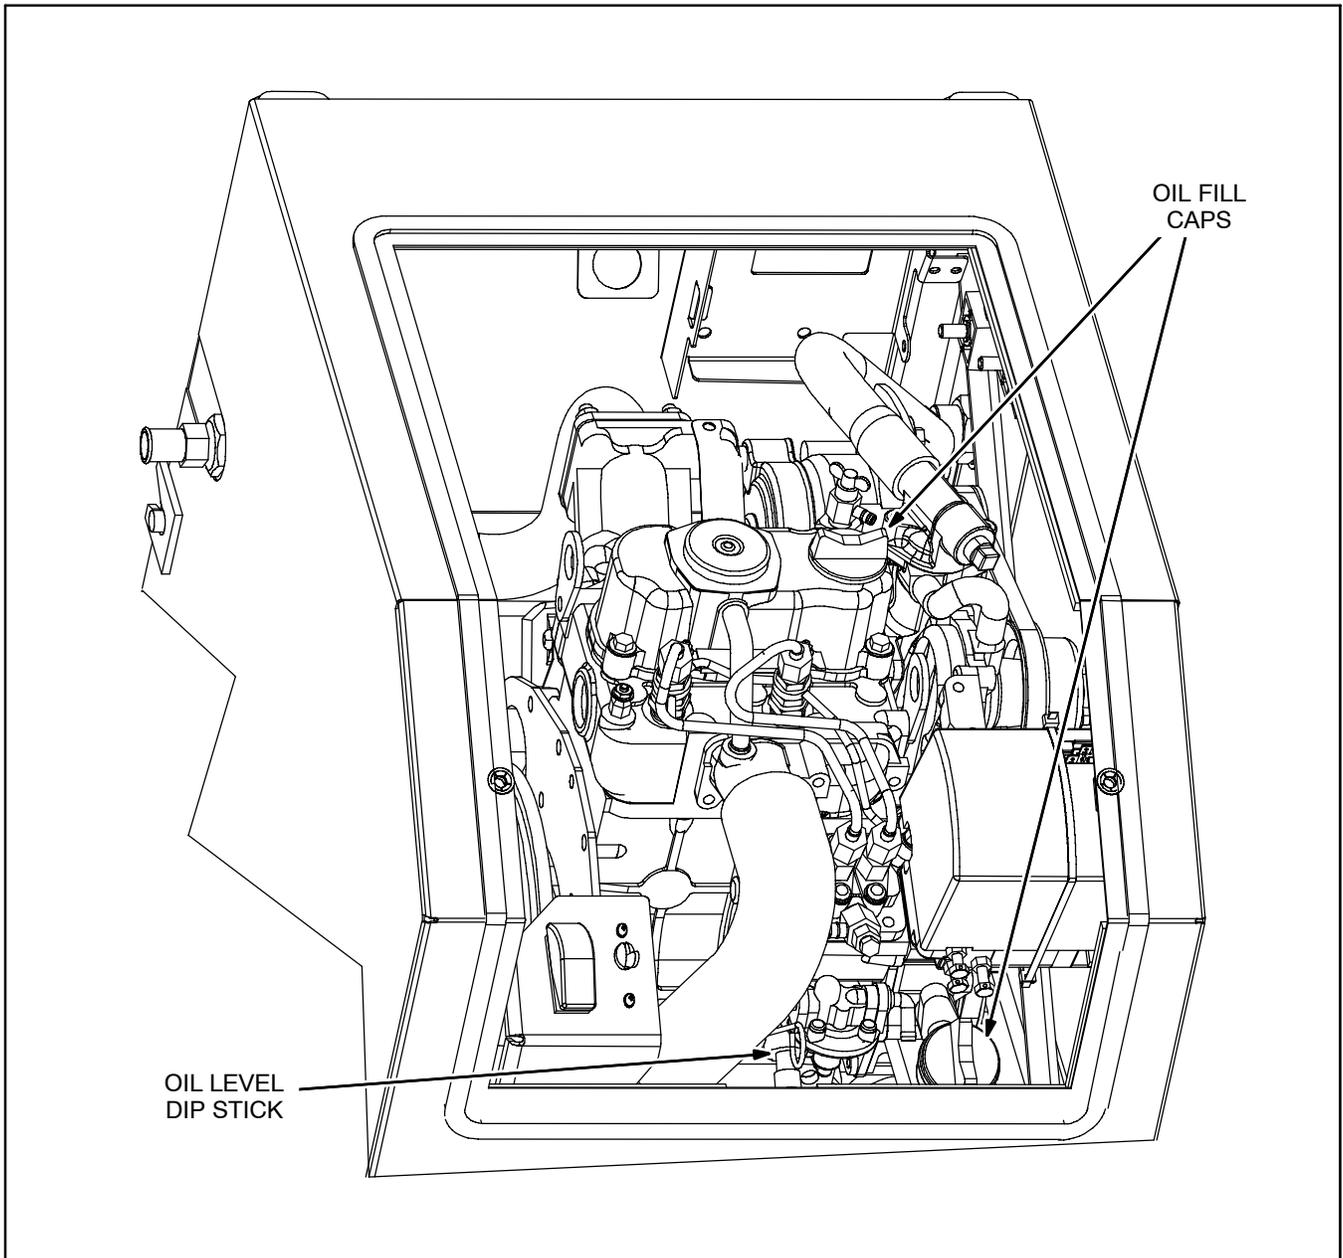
CHECKING ENGINE OIL LEVEL
